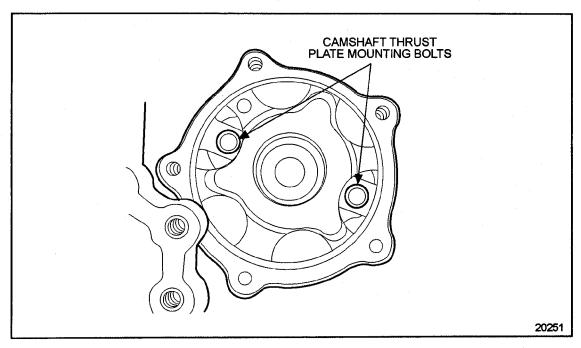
Camshaft Thrust Plate Mounting Bolts
